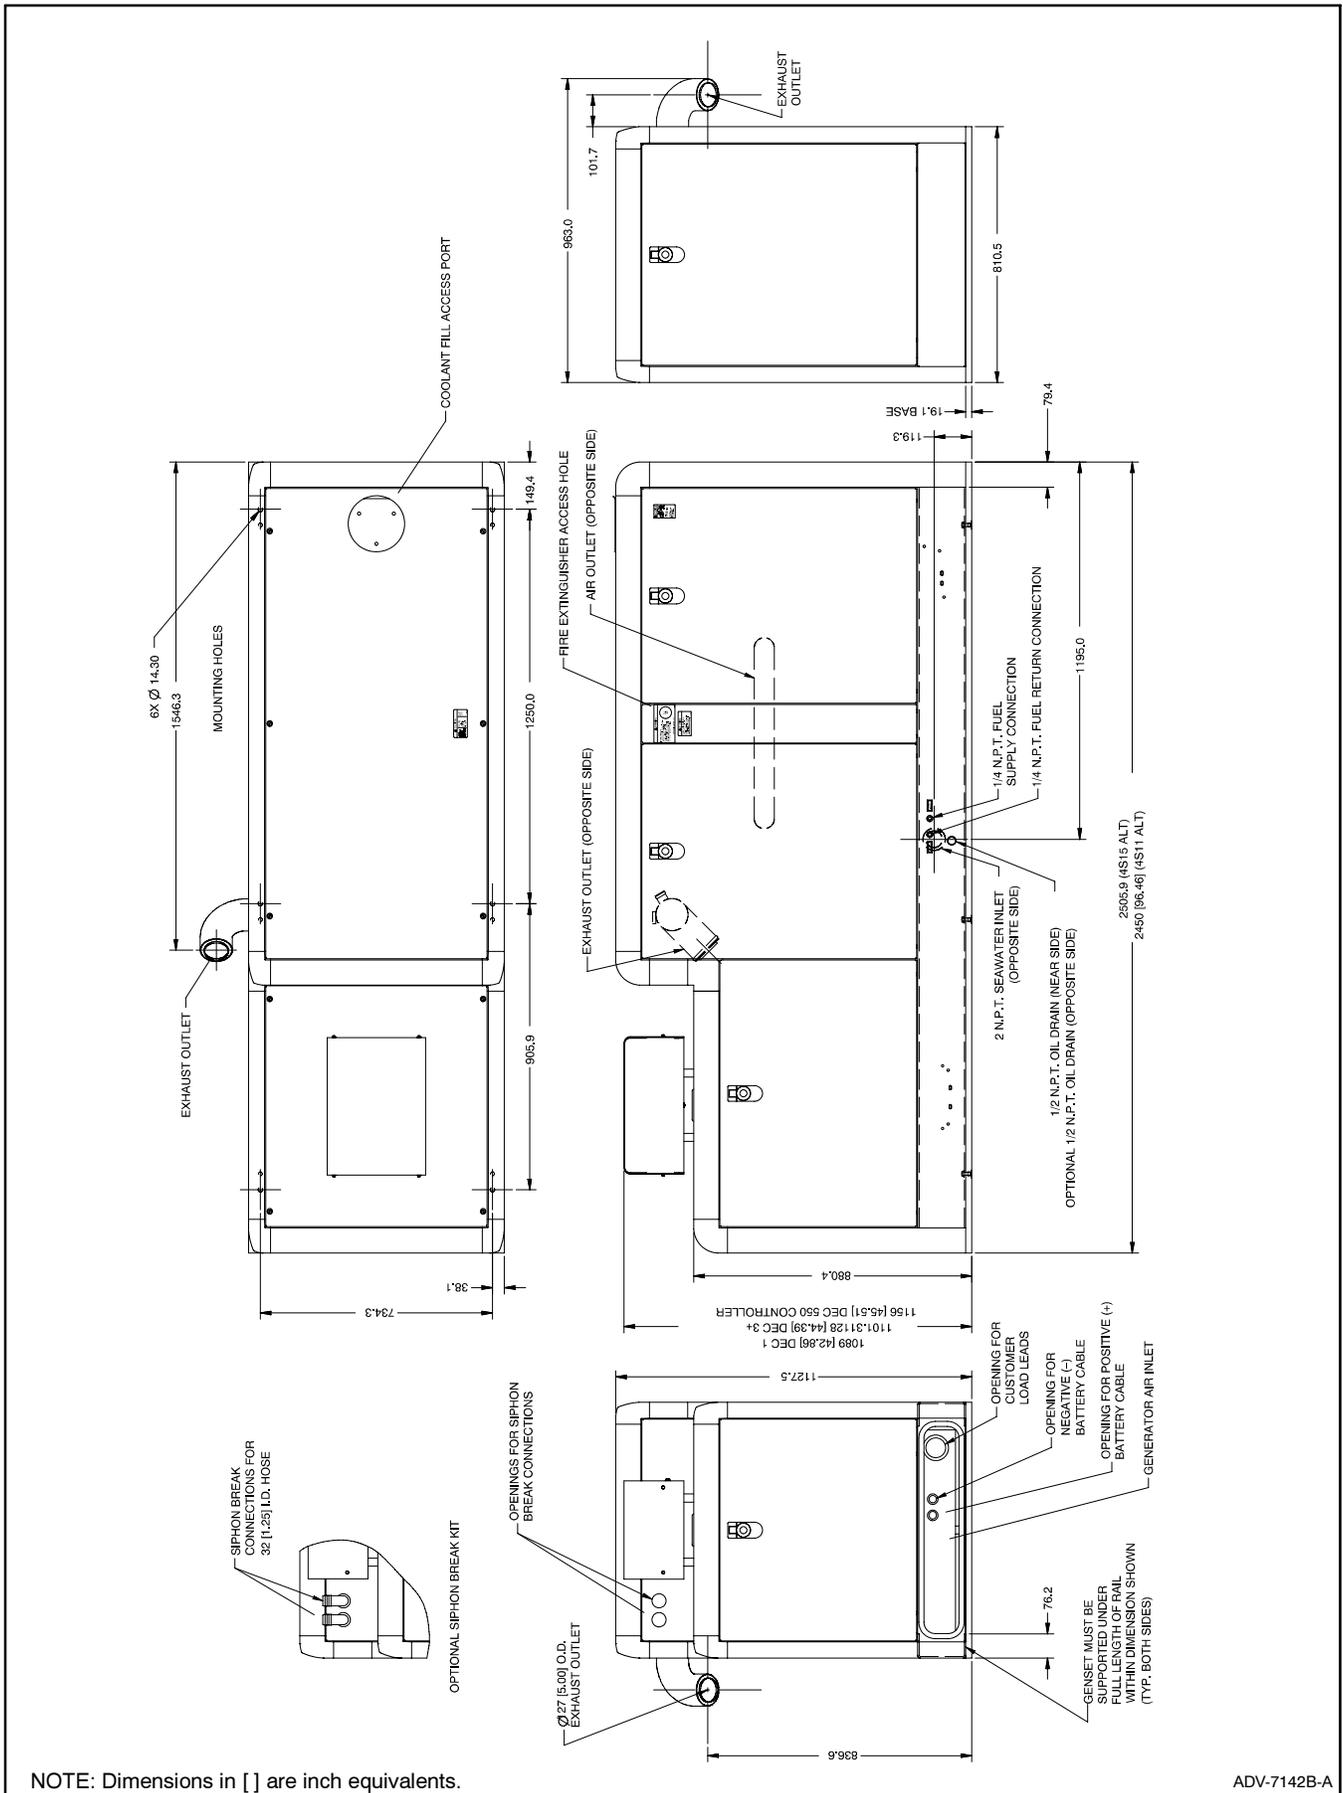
Dimension Drawing, 125/150EOZD and 100/125EFOZD with Sound Shield
